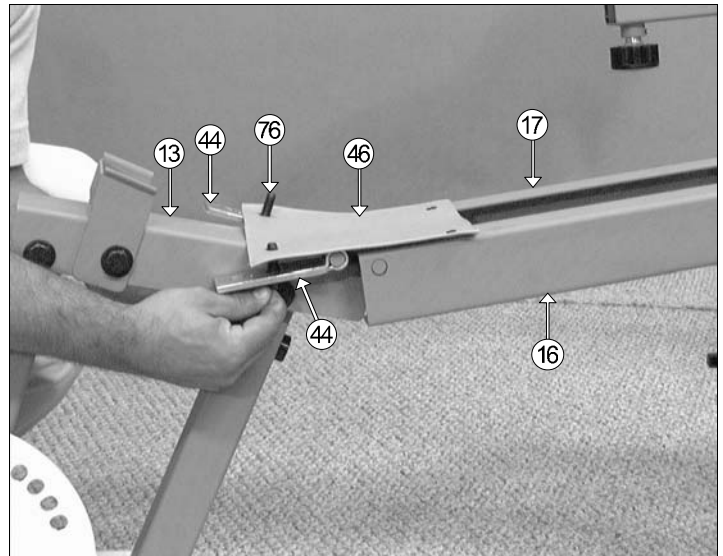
Place the Seat and Back Pad Cover (#46) on top of the Incline Bench Channels (#16, #17) and the Channel Seat Frame (#13).
